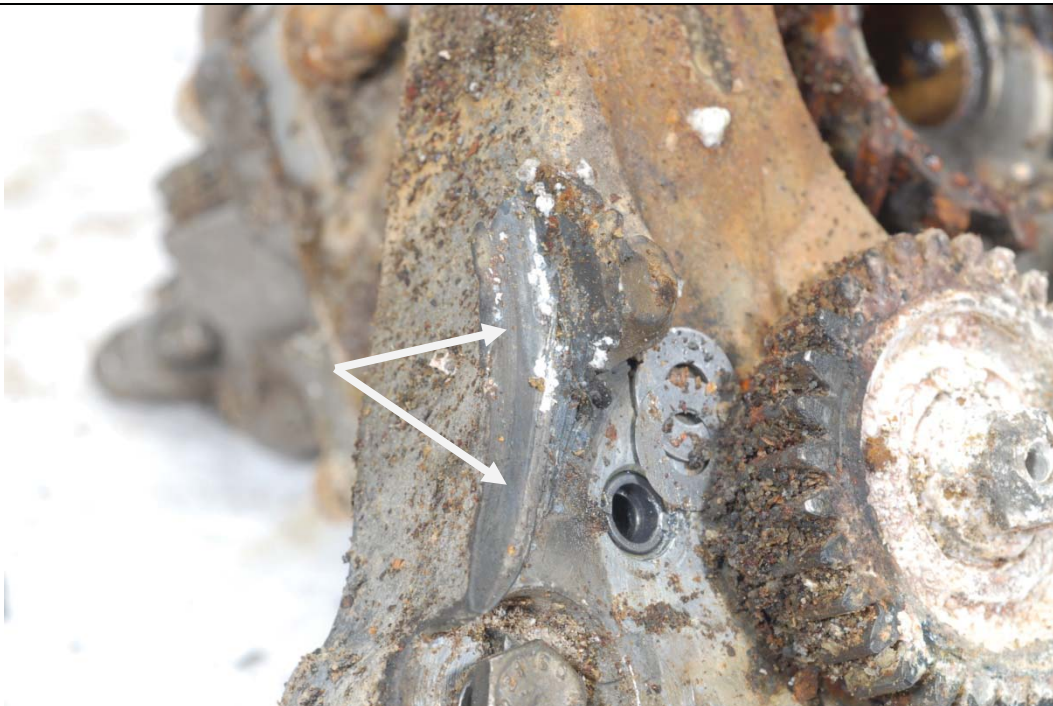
P-79001C, Propeller Governor “Spider” Gasket
